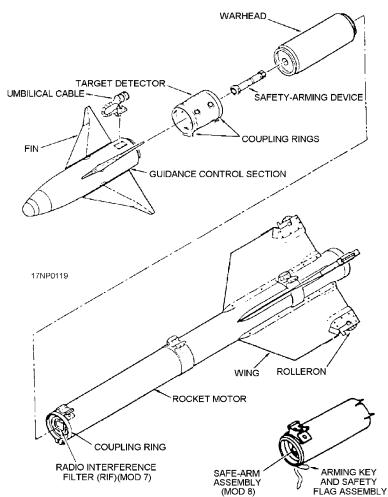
AIM-9 series Sidewinder guided missile (exploded view).
